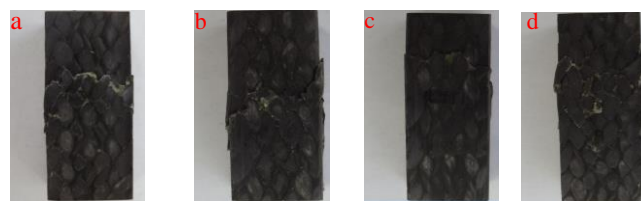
The fracture photographs of compression specimen at 90°C with different heating time (a) 90°C 15min; (b) 90°C 600min; (c) 90°C 1800min; (d) 90°C 3000min.
